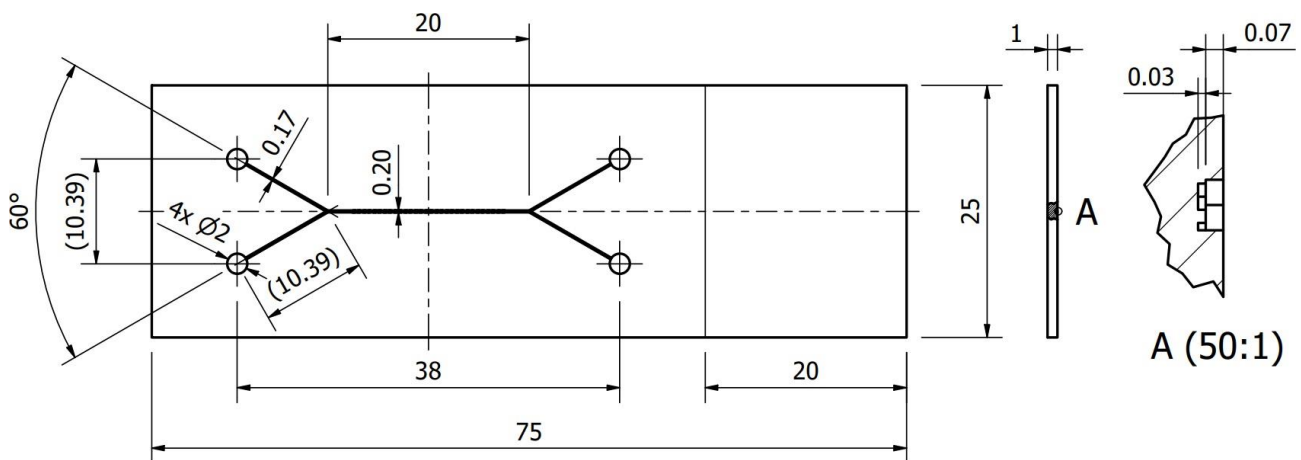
ISO technical drawing of the mixer device (dimensions in mm).
